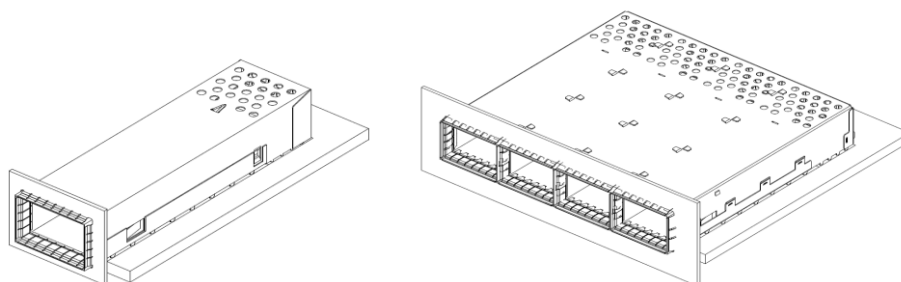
1x1 and 1x4 cage, host PCB and panel
